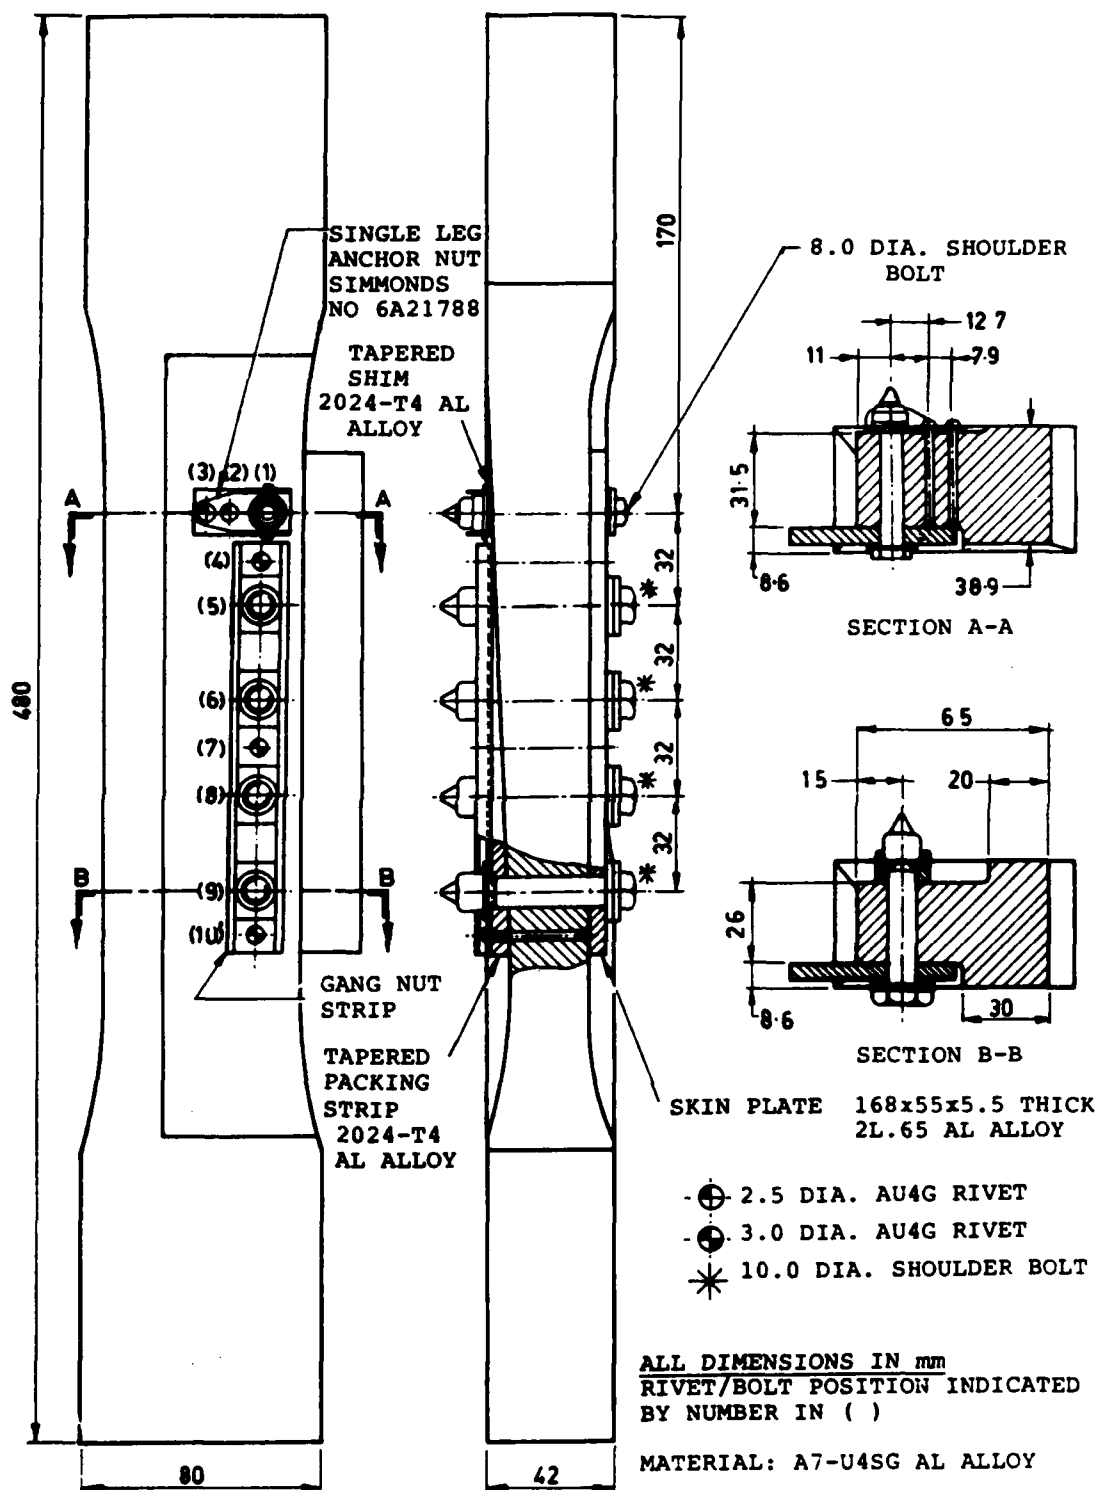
MIRAGE SPAR INNER LOWER REAR FLANGE FATIGUE SPECIMEN
